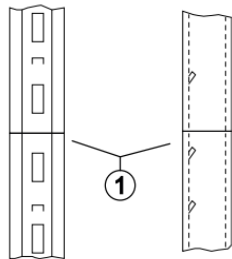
Proper Alignment and Abutment of Adjacent Rail Sections
